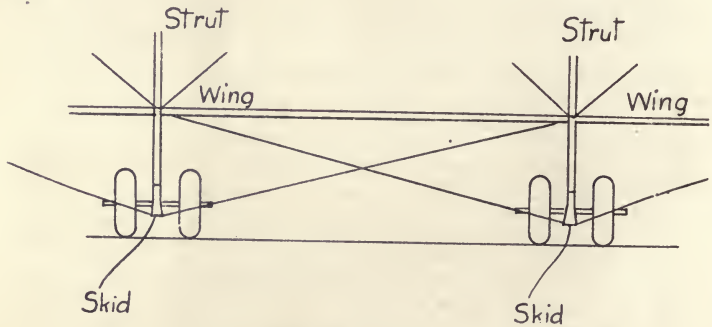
UNDERCARRIAGE FOR A HEAVY MACHINE.
